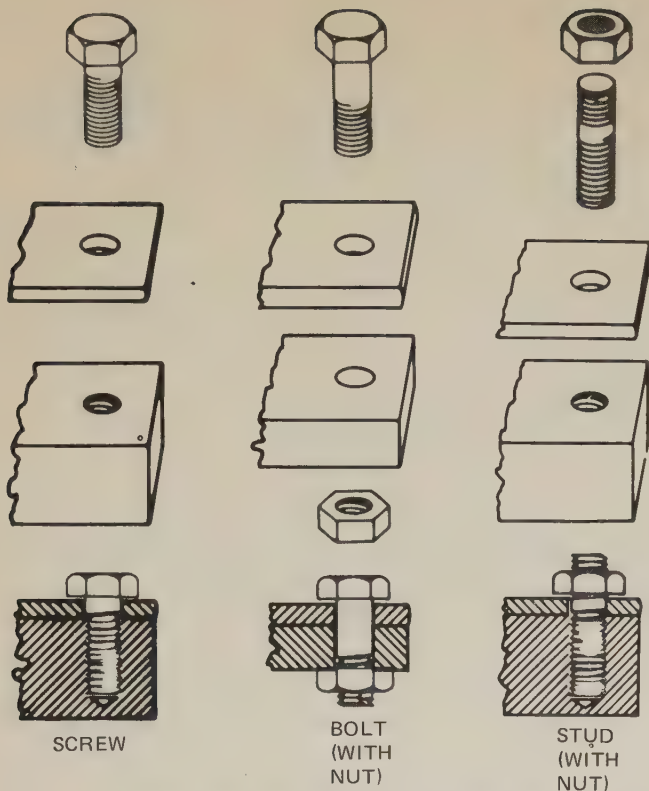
Screw, bolt, and stud. Top shows the attaching parts separated, but aligned for assembly. Bottom shows the parts together, in sectional view.
